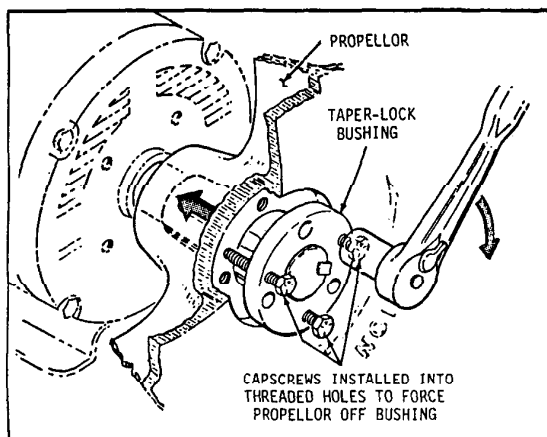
CAPSCREW ARRANGEMENT FOR DISASSEMBLY
